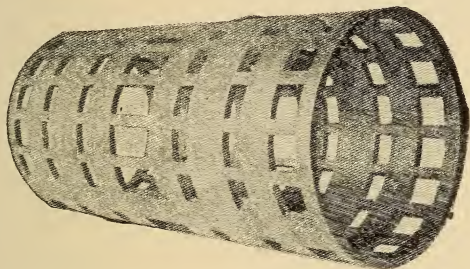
BUSHING FOR VAUCLAIN PISTON VALVE.
